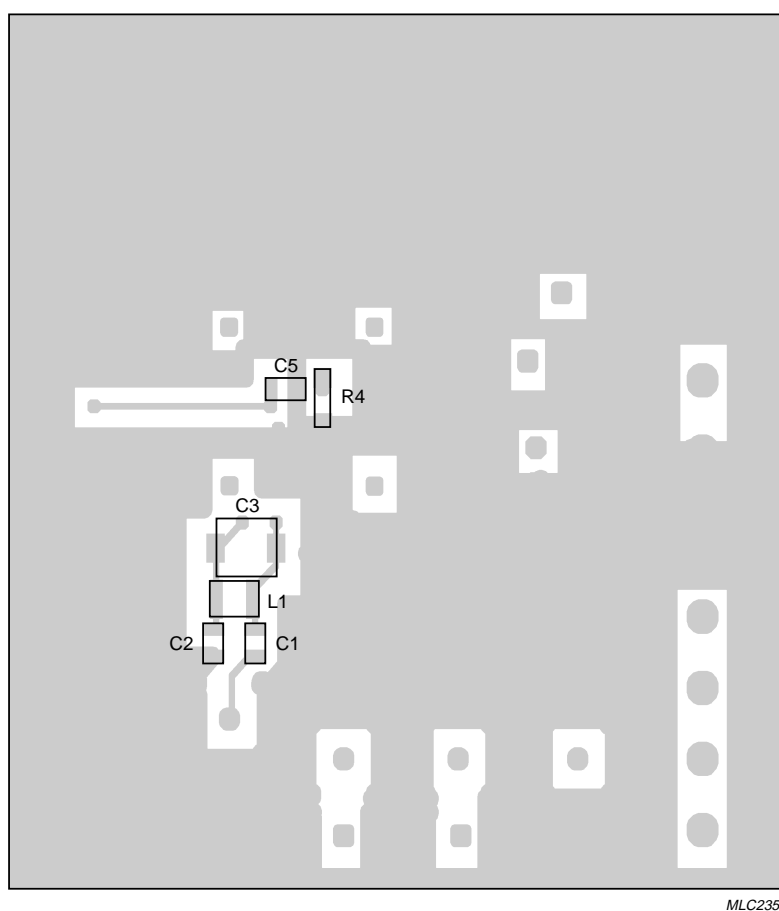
PCB bottom view with components for LQFP32; test circuit Fig.3.
